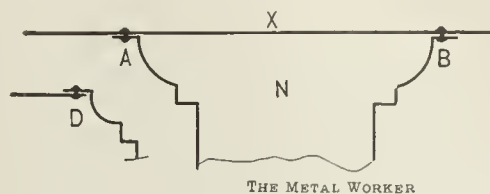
Riveting the Planceer.—Section through W X in Fig. 4.
